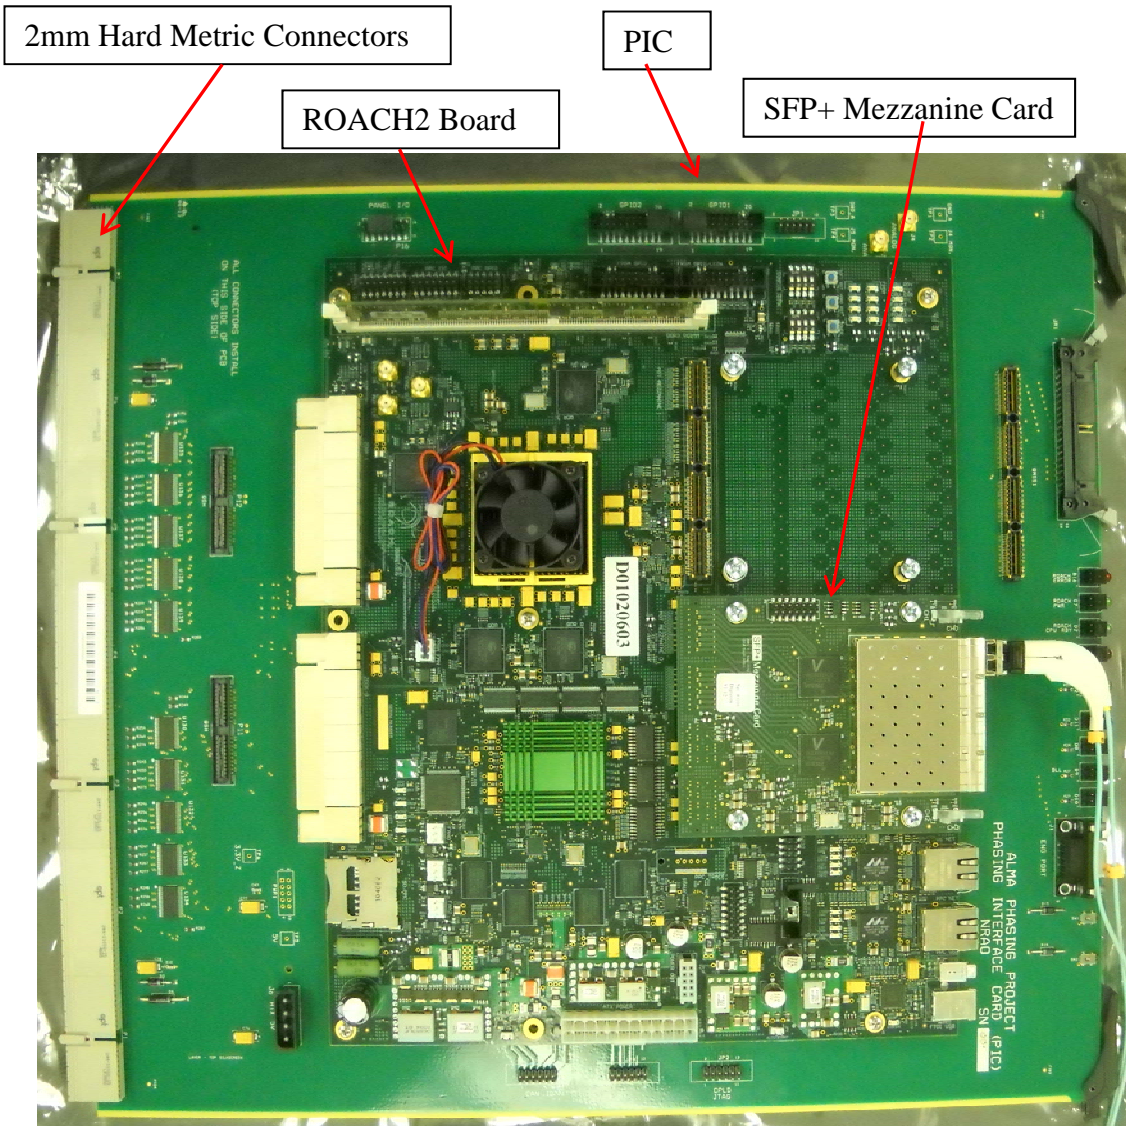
Phasing Interface Card Assembly (PICA). Electrical cables not installed.
